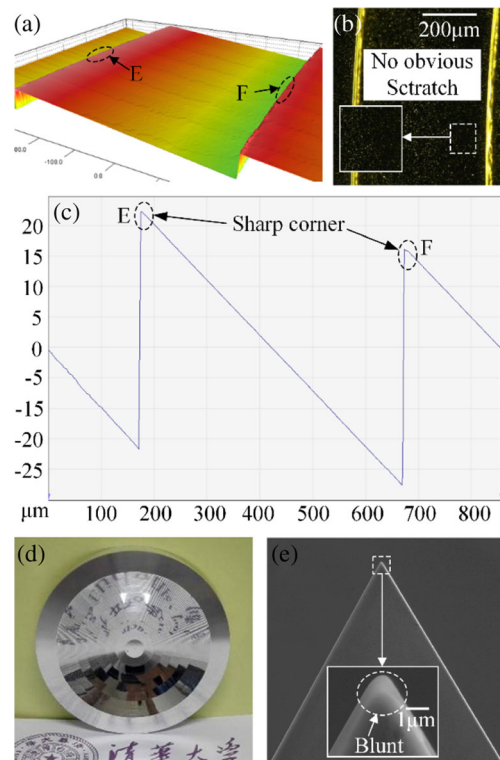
Experimental results of the second machining: a no obvious burrs (in three dimension), b no scratches on the machined surface, c no obvious burrs (in two dimension), d lens mold, and e slightly blunt tool
